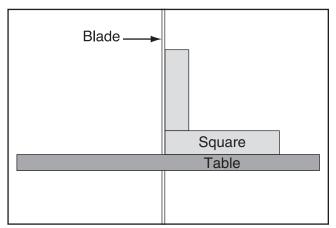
Using a square to adjust table perpendicular to the side of blade.
